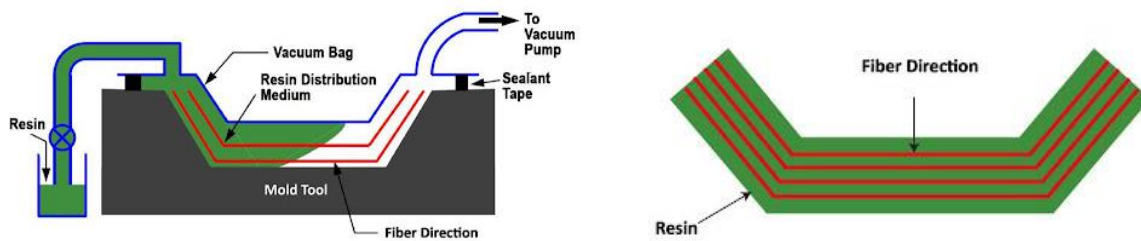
VARTM Fabrication Process Diagram: Illustrating the impact of mold tool, vacuum pump, and fiber direction on manufacturing of composites [6].
